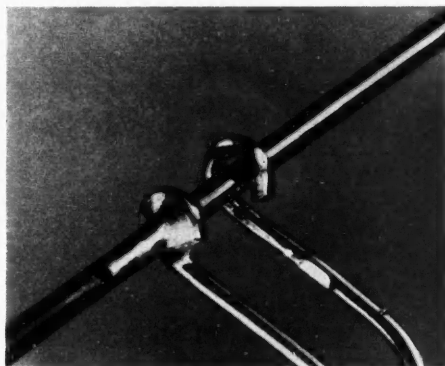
Soldering medium wire to thick. The medium wire is turned around the thick wire (right) and the loop soldered.
